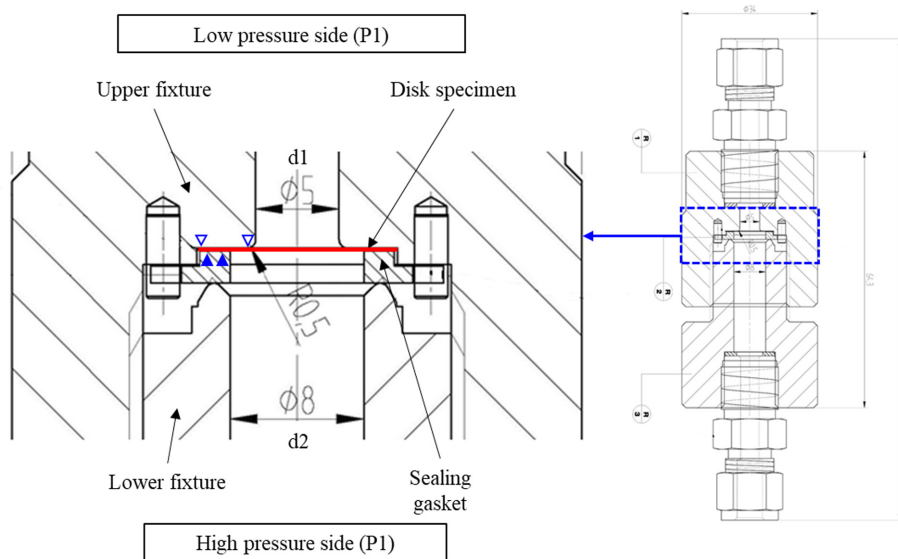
Cross-sectional drawing of disk specimen and RDCT device
